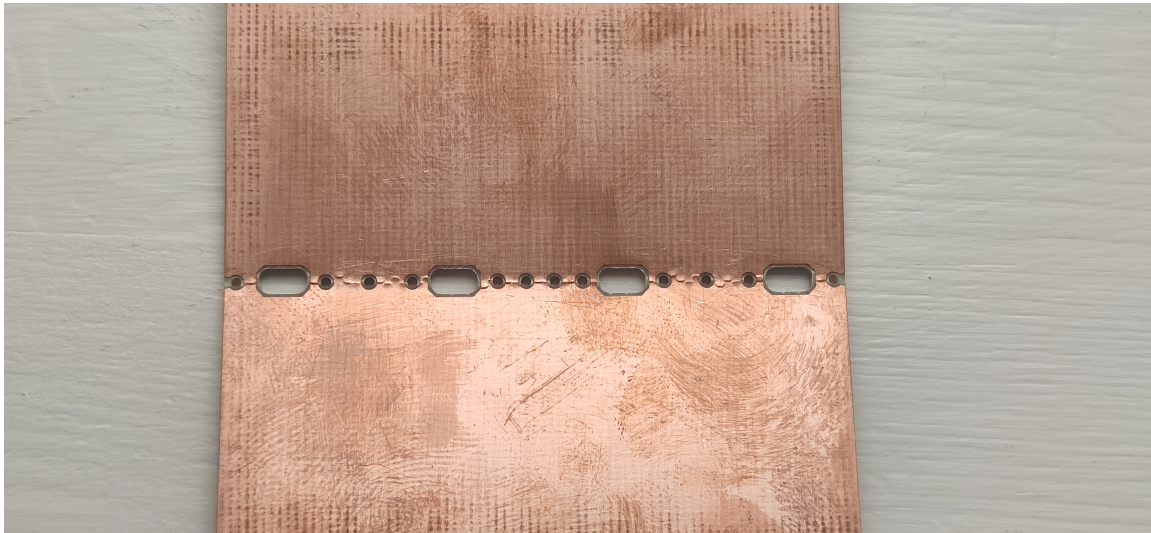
Top side of the mechanical test specimen "EcoSH" after the three-point-bending test.
